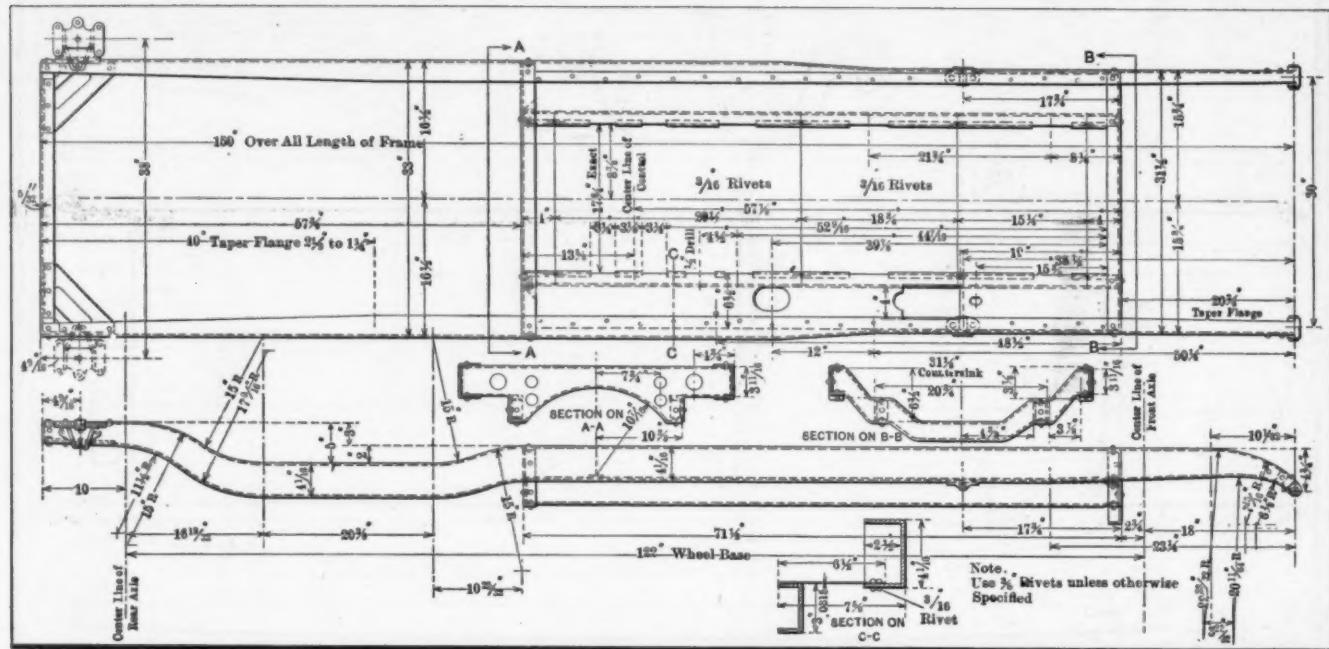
Chalmers-Detroit frame in plan and elevation, with double drop rear and narrowed in front
